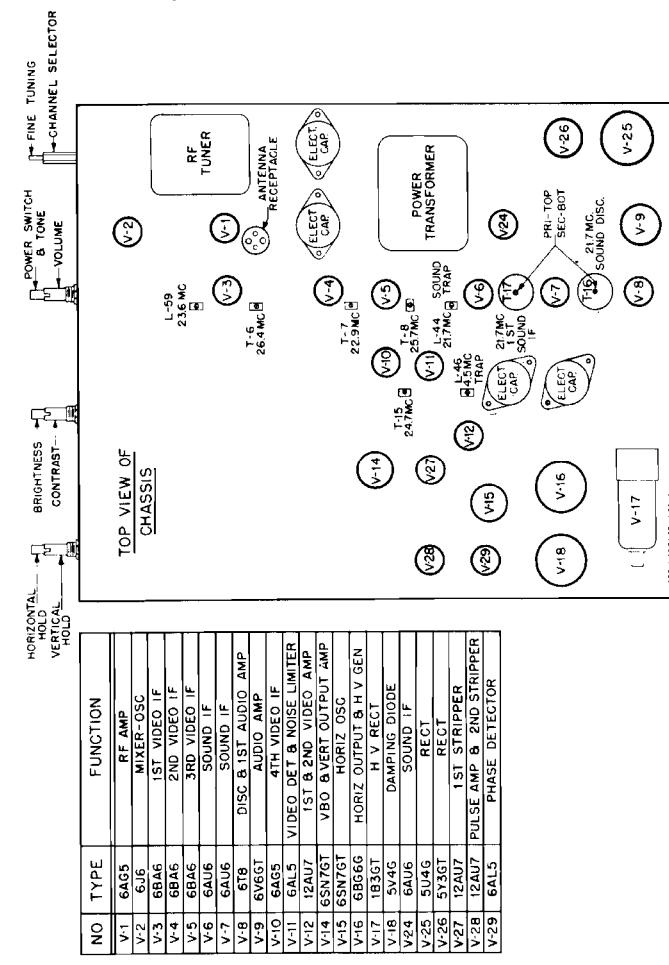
CHASSIS TS-9D TUBE & IF ADJUSTMENT LOCATIONS
